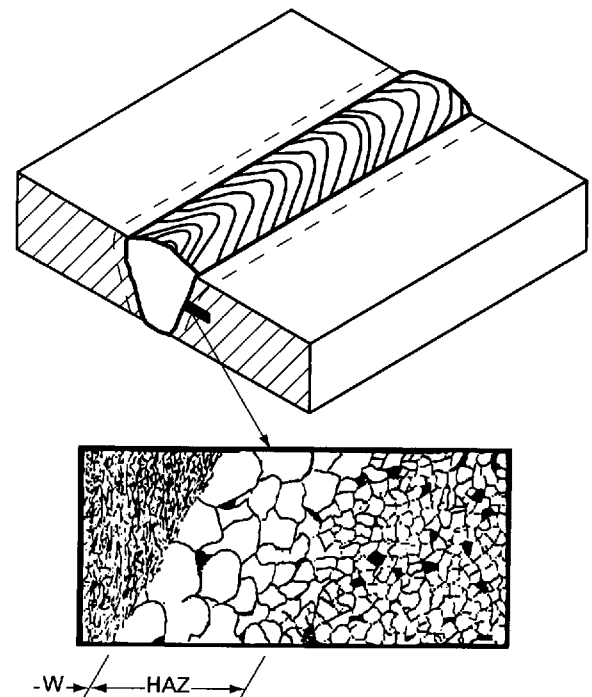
Single-Pass Weld in Steel, Showing Weld Metal (W) and Coarse-Grained Heat-Affected Zone (HAZ)
